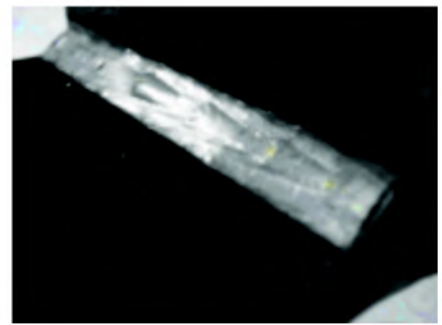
A $\frac{3}{16}$ -in. fillet weld made at 2 m/min.
